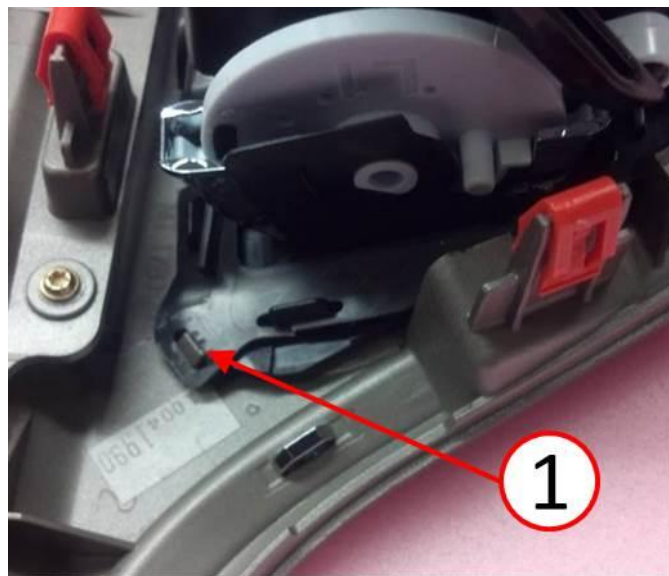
HVAC Outlet Lower Inner Corner Attachment
